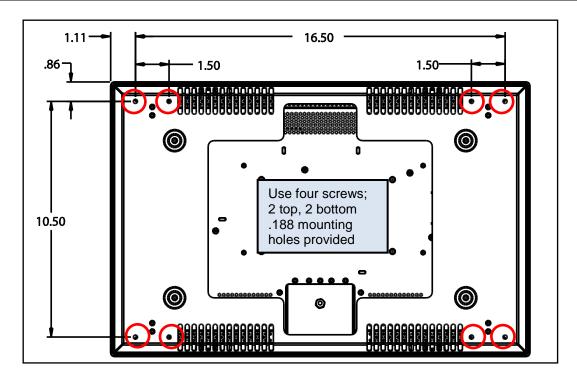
Rear view of the 1901-800 cosmetic back (shown with chassis) for a proud mount
